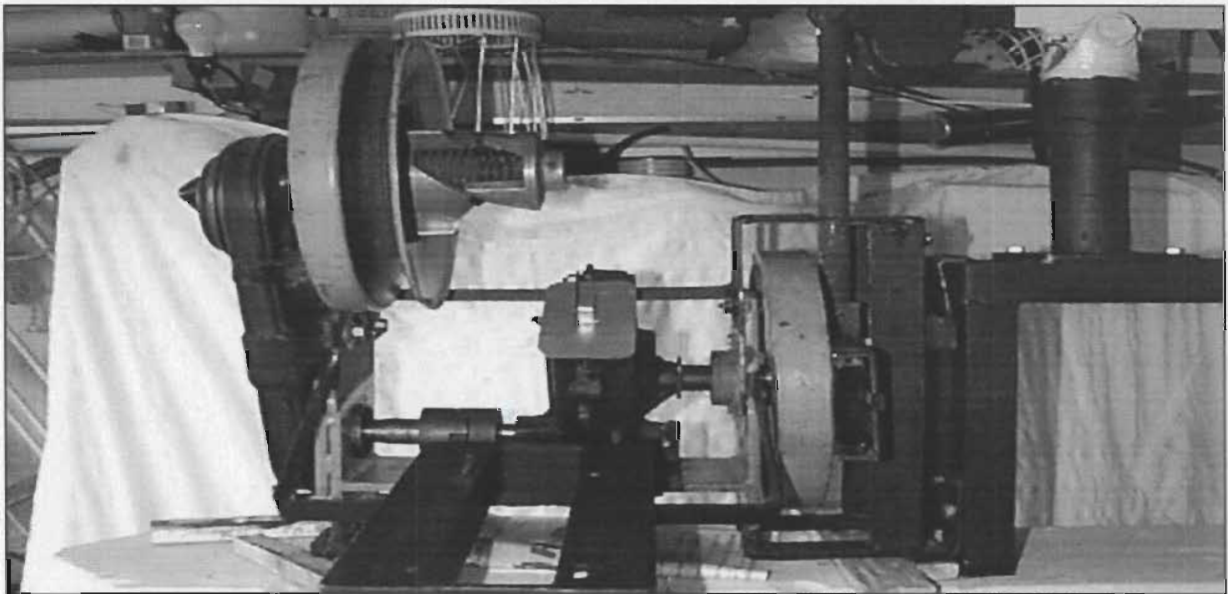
Actual assembly for reducer-oscillator gear and mounting brackets and seat
